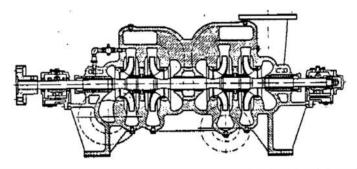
Multi stage axially split volute casing with back to back impellers.
